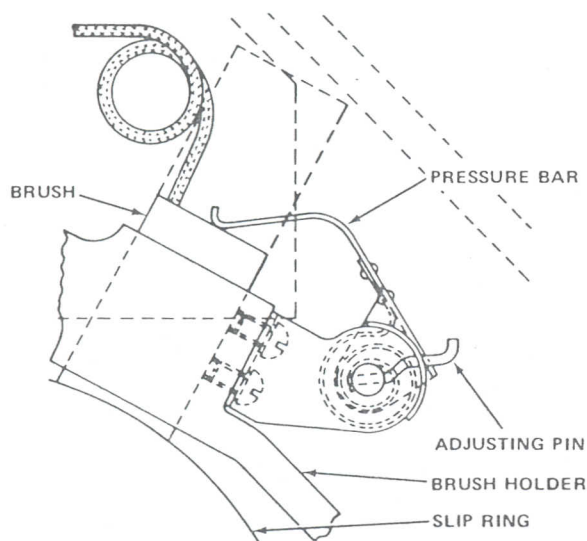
Typical Adjustable Brush Holder Assembly, AC Motors
